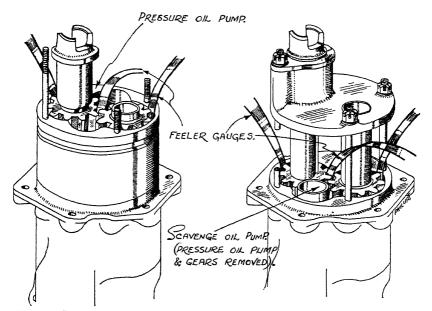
Showing checking of backlash between each pair of oil pump gears.
